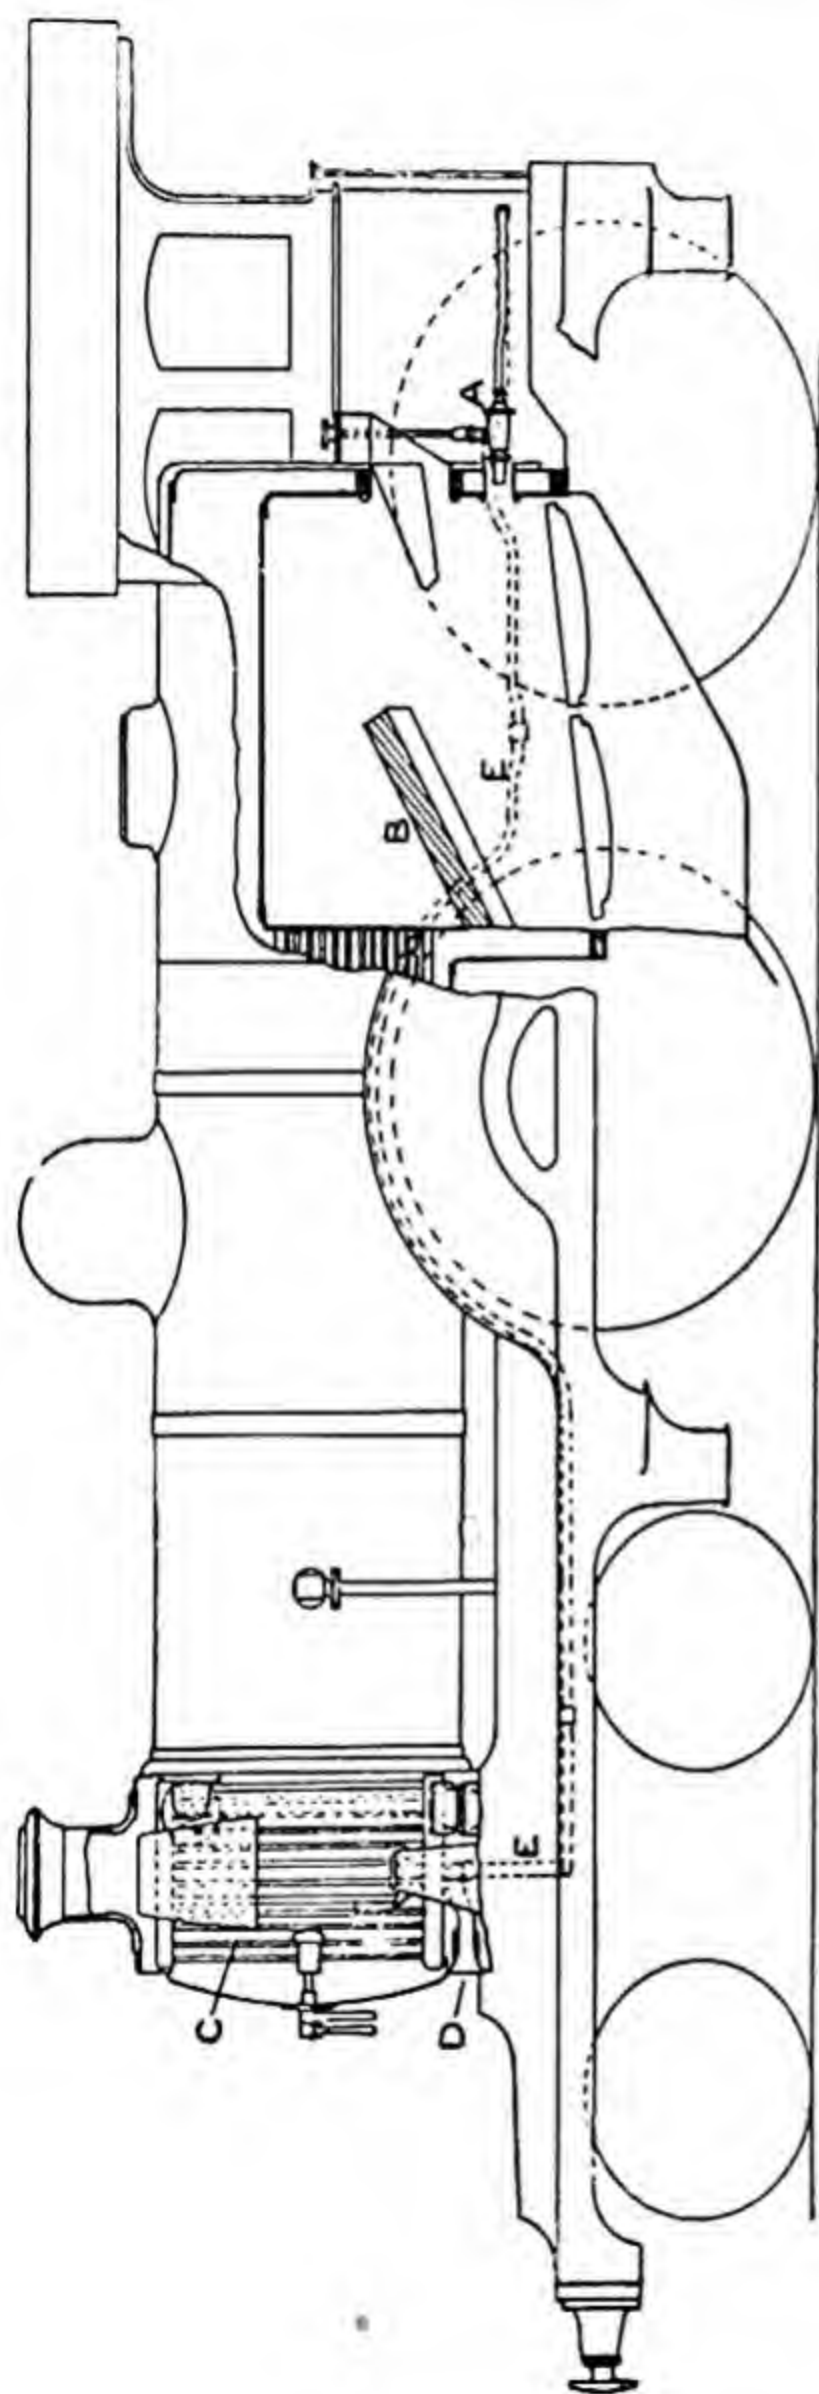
Oil fuel arrangement on a Great Eastern Railway express passenger locomotive.
